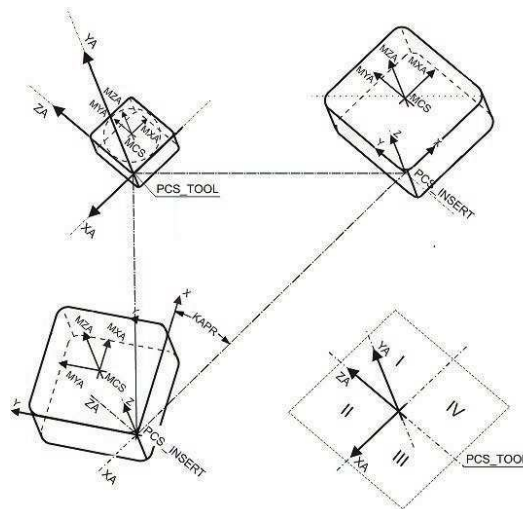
Orientation of PCS_INSERT, MCS_INSERT and PCS_TOOL on side cutting edge angle
